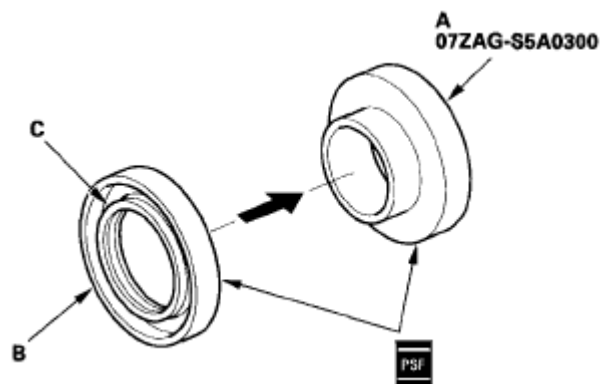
Identifying Seal On Seal Slider With Grooved Side
